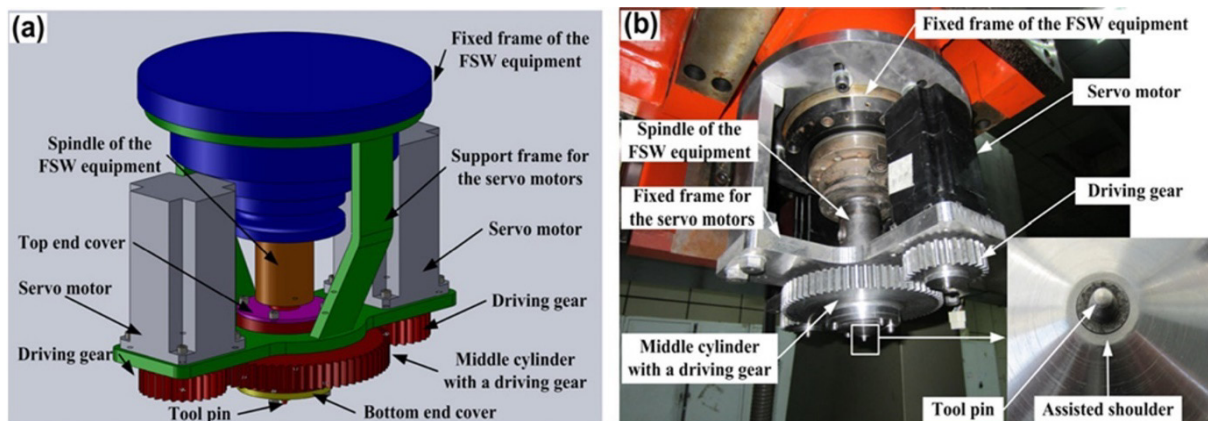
RDR-FSW (a) Schematic view and (b) Tool set-up image [131].
